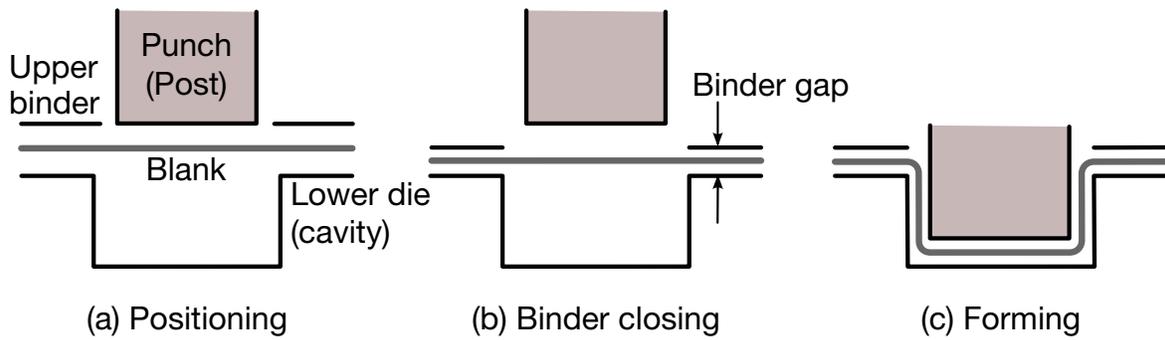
IDTEMP = 2: forming in 3-piece toggle draw.
